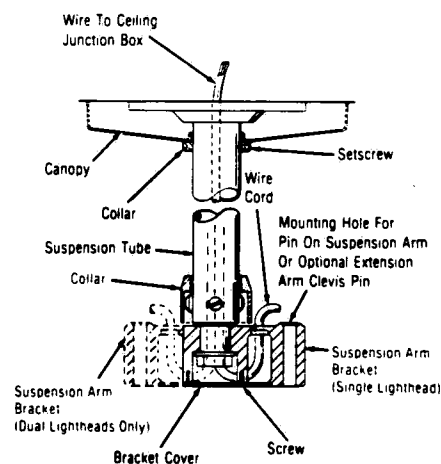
DUAL CEILING MOUNTED FIXTURE WIRING.
